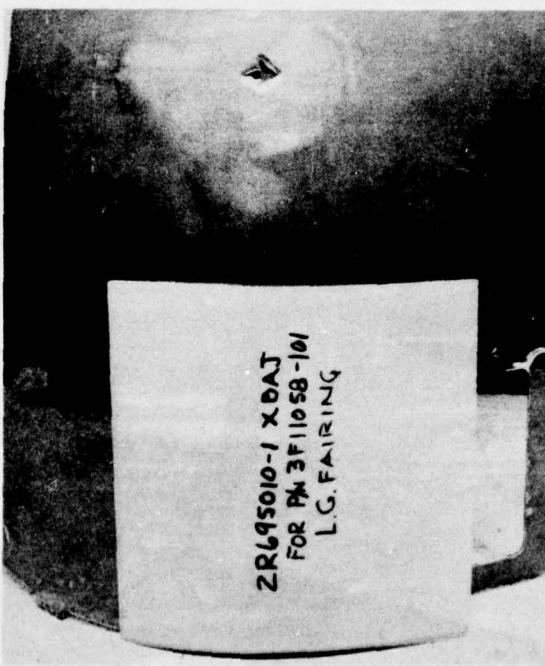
Damaged Access Panel and Molded Fiberglass Bond Assembly Jig (BAJ)
